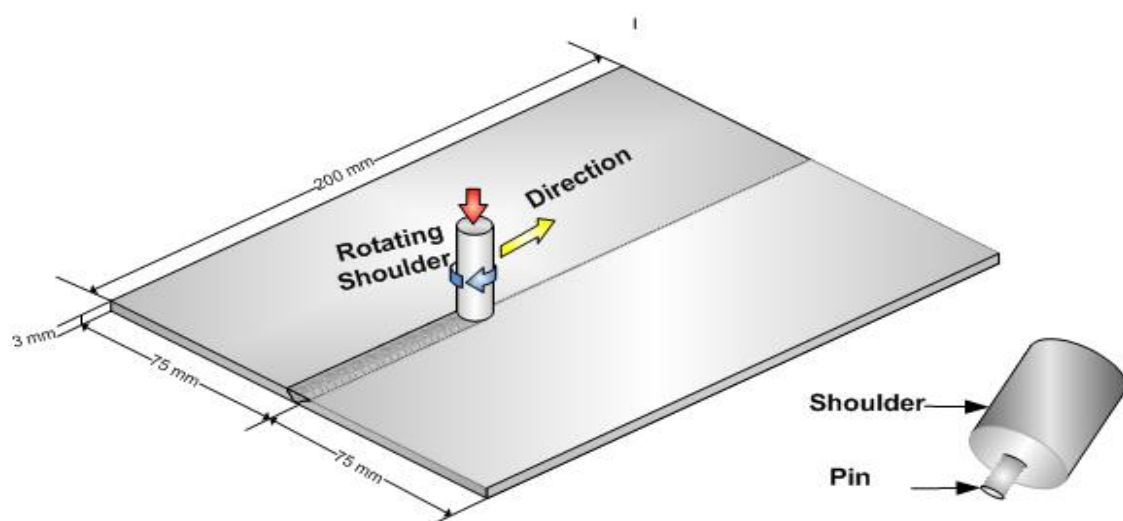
Schematic of friction stir welding (FSW) for plates
